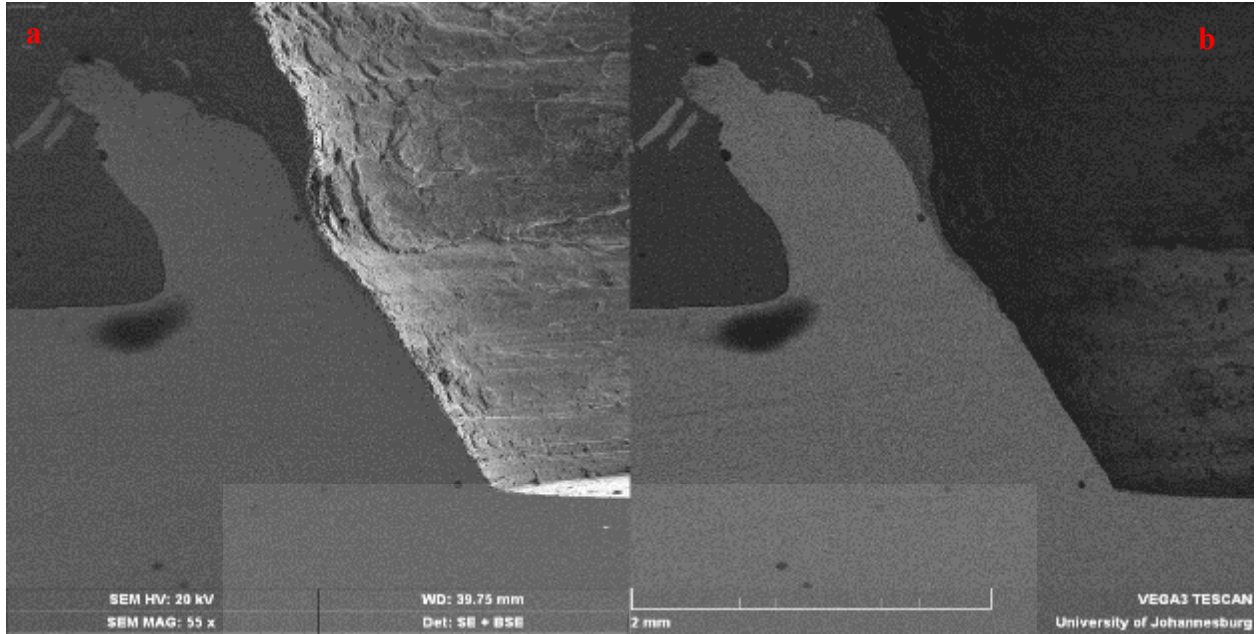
Showing a secondary electron (a) and a backscattered electron (b) images of the spot weld produced at 800 rpm and 0.5 mm plunge depth using a conical pin and a concave shoulder tool
